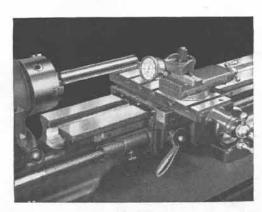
Showing test piece in chuck and dial indicator in tool clamp.
